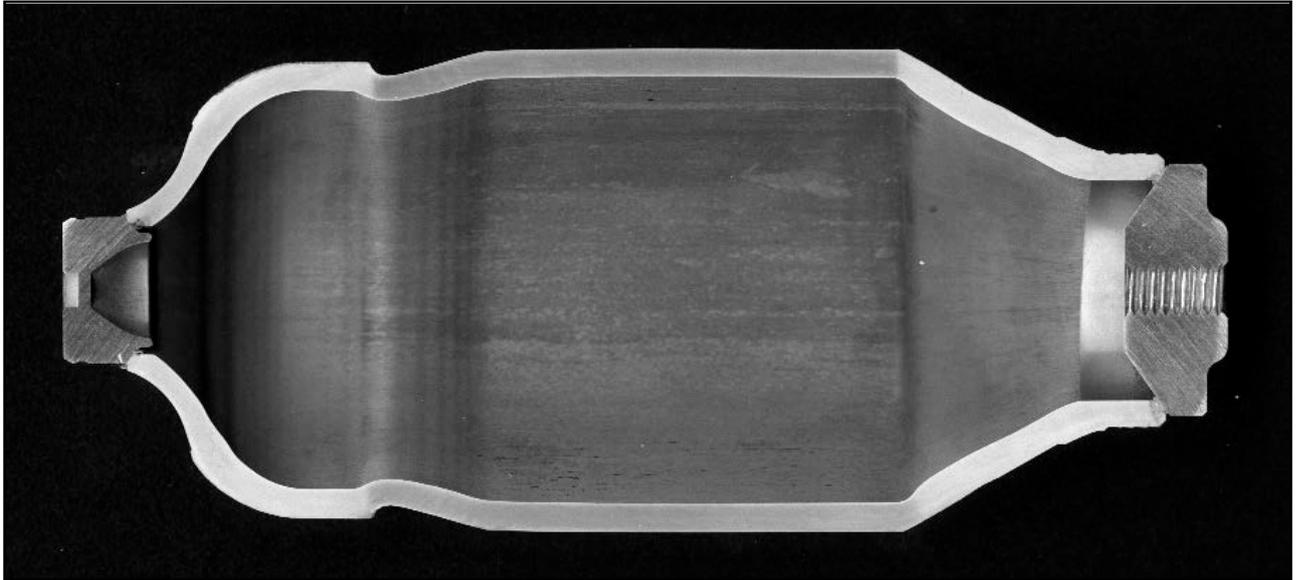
Transformed cold gas cylinder with welded plug (right) and welded support of the membrane (left).
